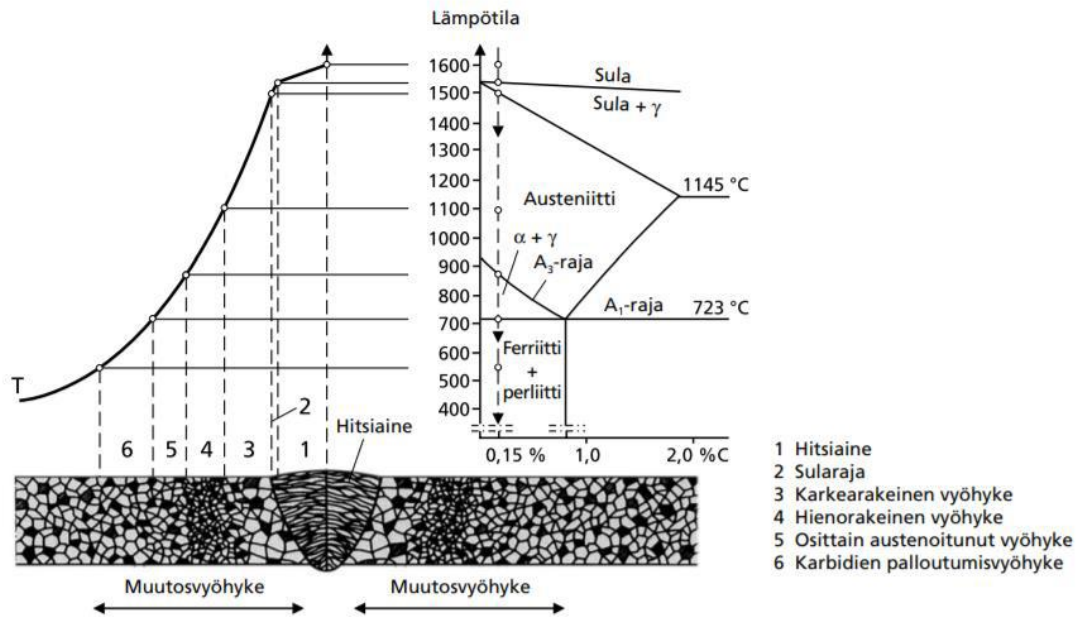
Fusion zone of a weld (Ovako, 2012)
